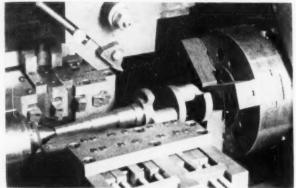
Air operated, three jaw Universal Chuck showing false jaws in gripping position. Notice numerous cutting tools with inserts for heavy duty work.
